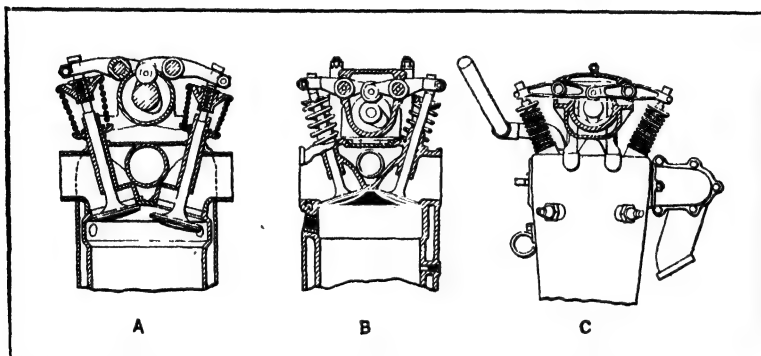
Examples of Direct Valve Actuation by Overhead Camshafts. A—The Original Design Used on Mercedes Engines. B—Hall-Scott. C—Early Wisconsin Engine.
